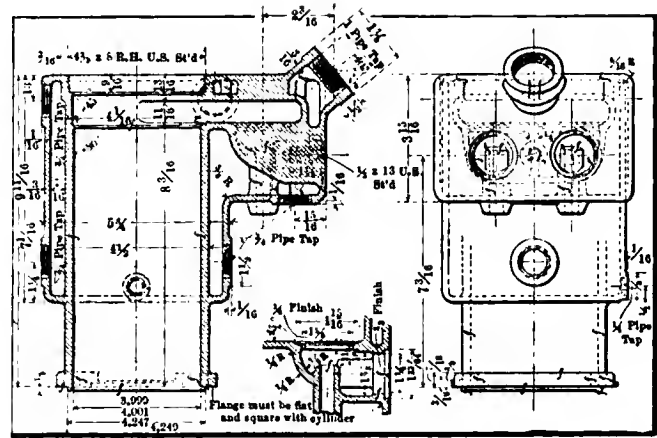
Cylinder of gray iron, with screwed in head, bevel seat to make it tight, and valves at one side
